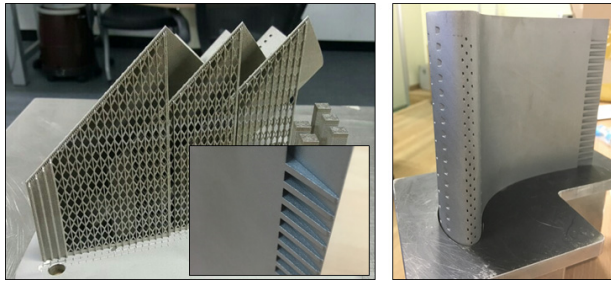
Photographs of 3D printed test nozzle vane (before coating)
